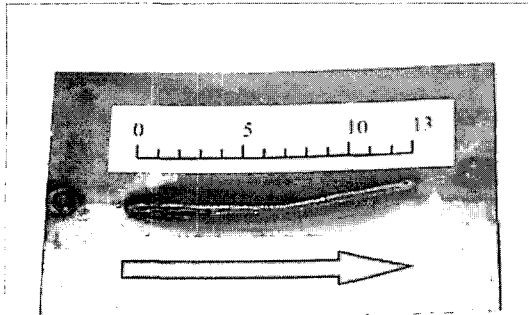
Photograph of weld seam tracking result (welding speed 12 mm/sec, offset angle 10°)
